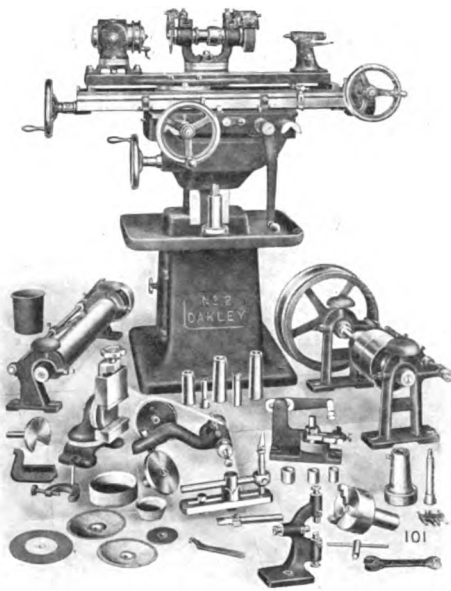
No. 2 Oakley Universal Cutter and Tool Grinder
